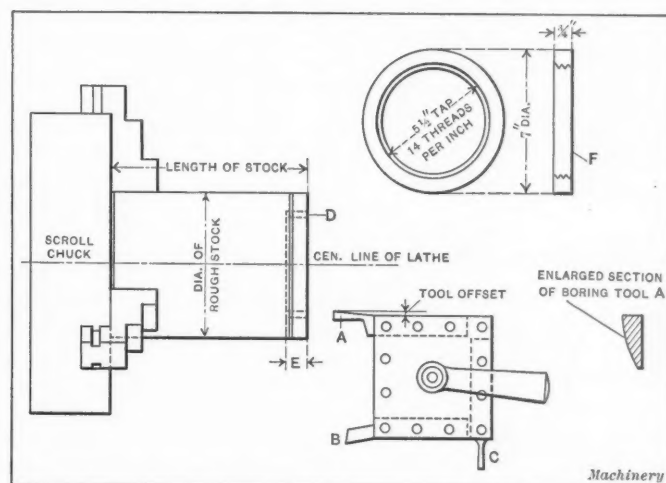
Tooling of Turret Lathe for machining the Blanks
